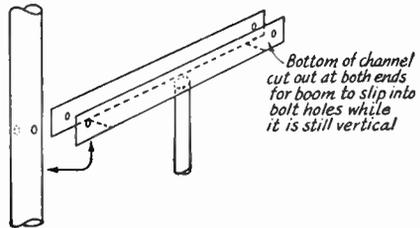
The mounting plate is made from a length of "U"-channel iron cut and drilled as shown. The boom is raised vertically until one set of bolt holes is in line and a bolt is slipped through. The boom is then swung into its horizontal position and the other bolt is put in place.
